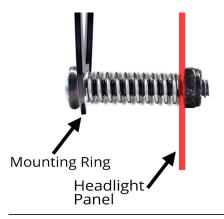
Using the mounting ring as a template, use a 6mm or ¼ in. bit to drill three holes in the vehicle's headlight panel.
